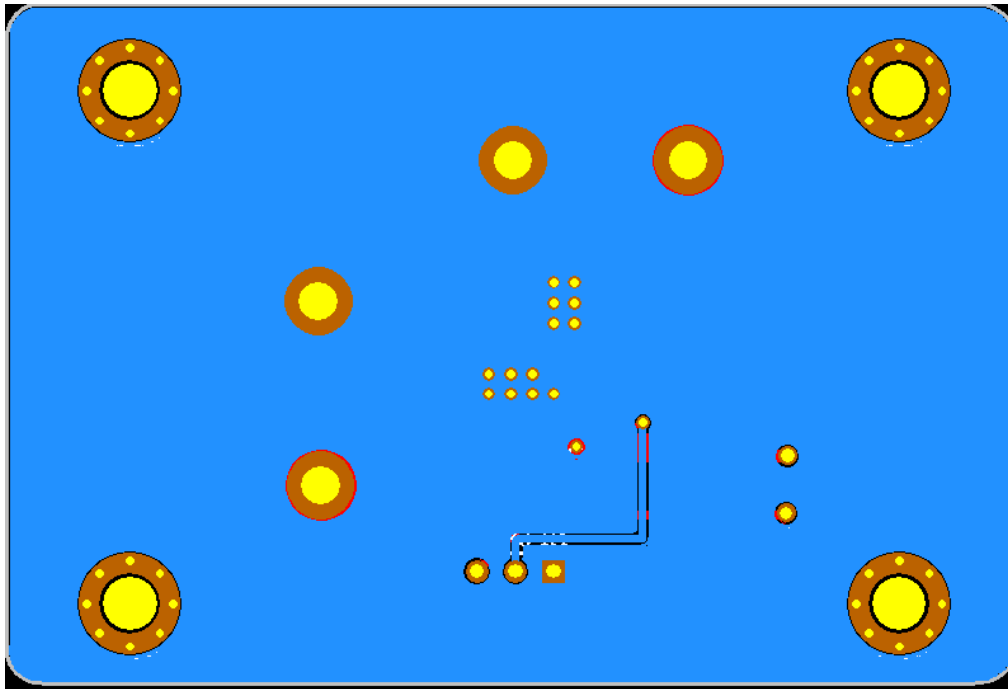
AP61102Z6 - EVM - Bottom Layer EV Board View
